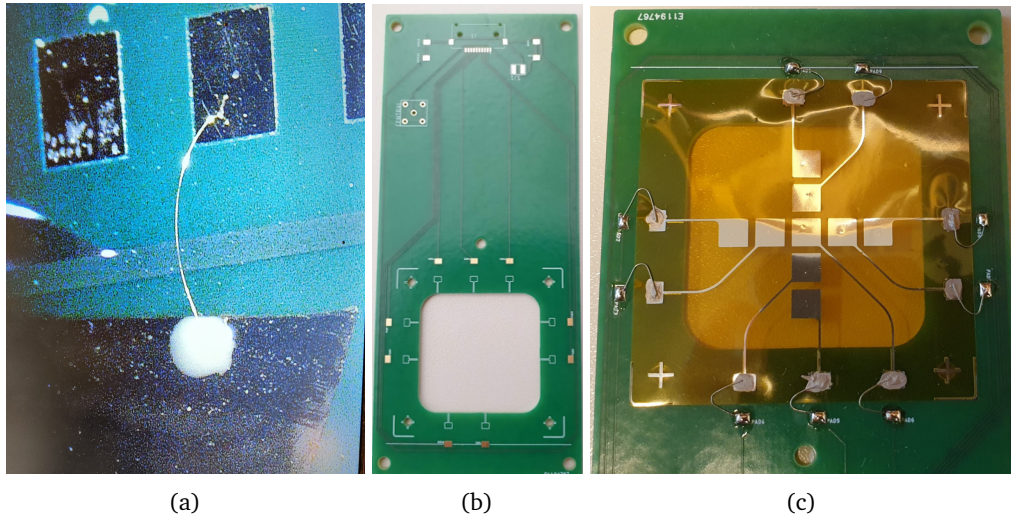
(a) After successful bonding on the side of the PCB the wire is attached to the conductive glue which is applied on metallised Kapton®. (b) PCB frame designed to support the new flexible BPM devices and host the electrical connection. (c) Copper wires connecting electrically the pads of the BPM with the readout PCB.
